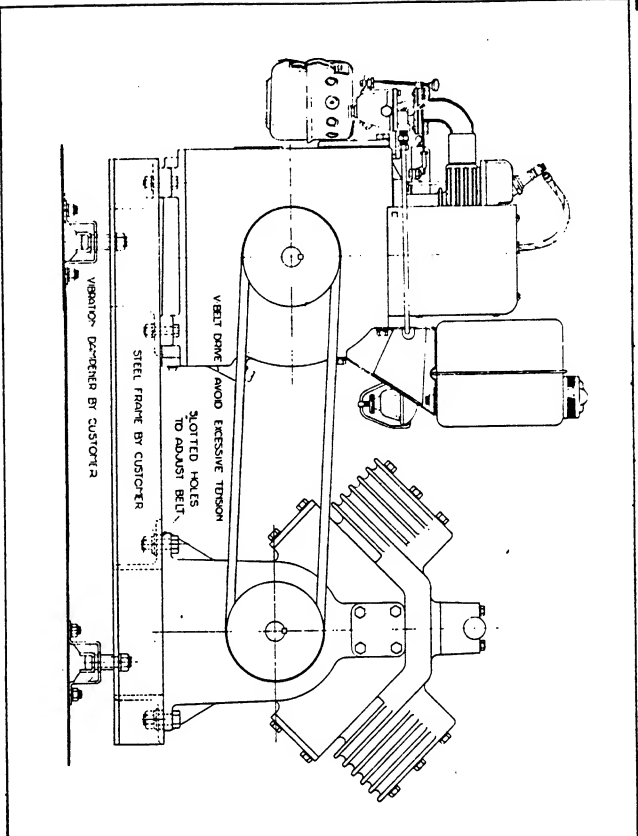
FIG. A-TYPICAL MOUNTING-ENGINE AND LOAD ON SINGLE BASE
